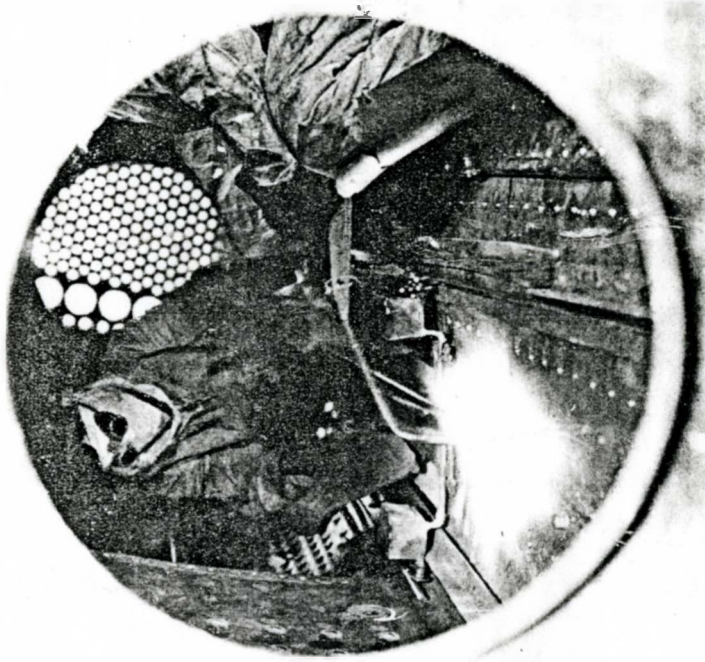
Locomotive firebox. Welding in progress on the joint between half side-plate and crown shown in the previous photograph.
